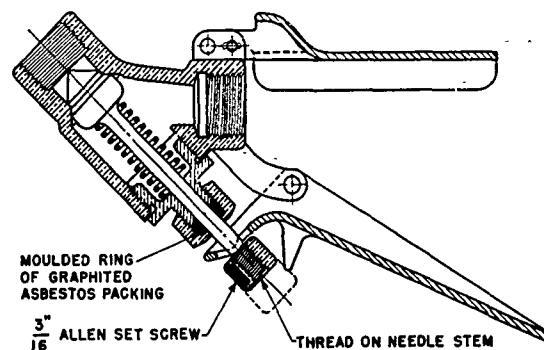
Cutaway of quick-opening Y valve for M1A1 portable flame thrower.
